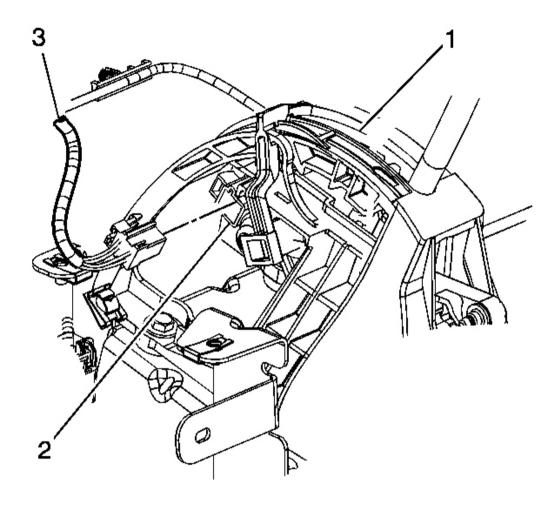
Shift Lock Actuator & Electrical Connector Courtesy of GENERAL MOTORS CORP.
